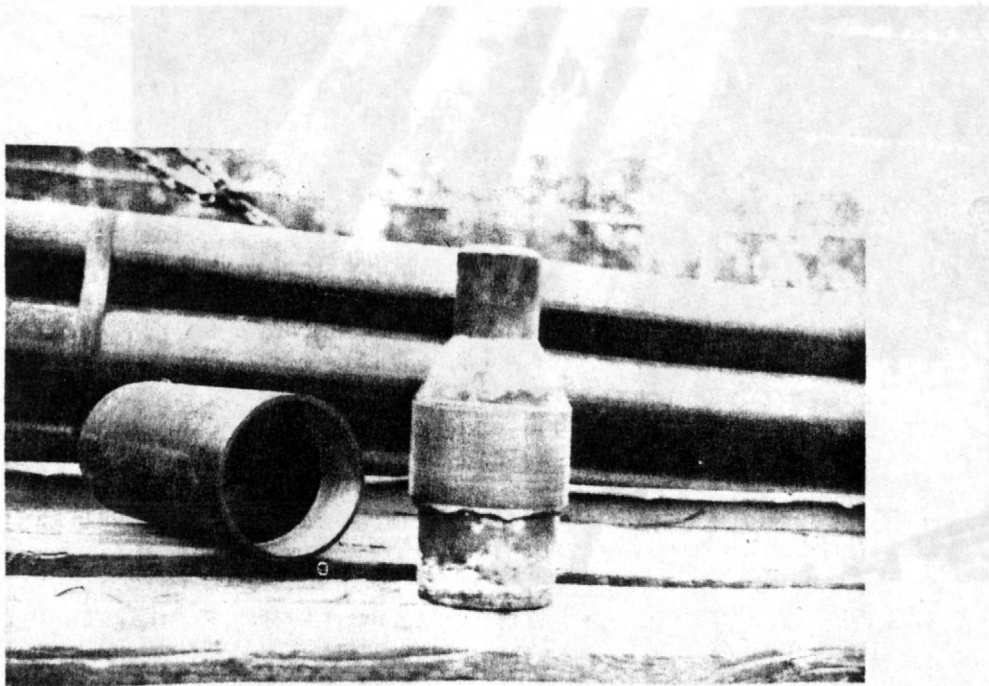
Drill-rod sub screwed in coupling butt-welded to joint of
